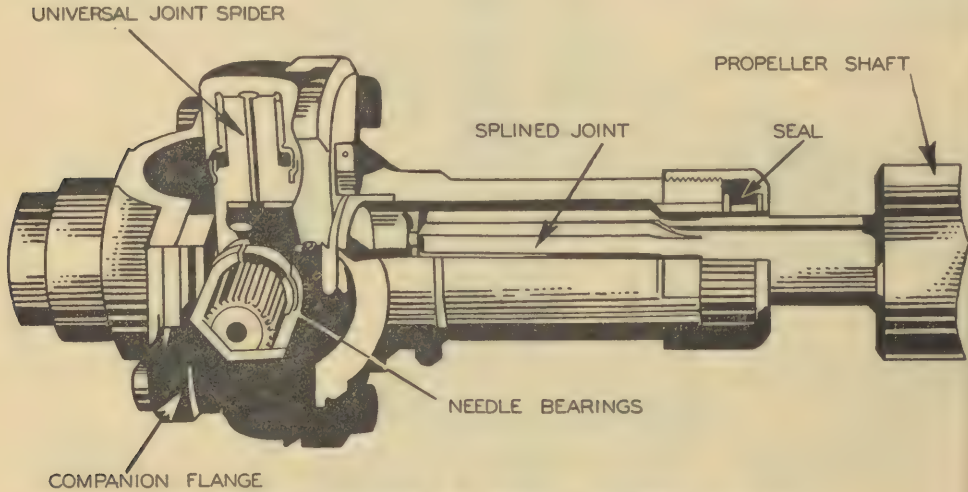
Propeller Shaft, Slip Spline and Universal Joint.
